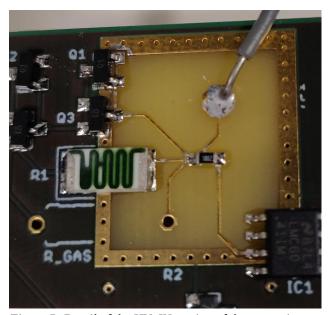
Detail of the HV_IN section of the transmitter PCB, showing anti-leakage design features.
